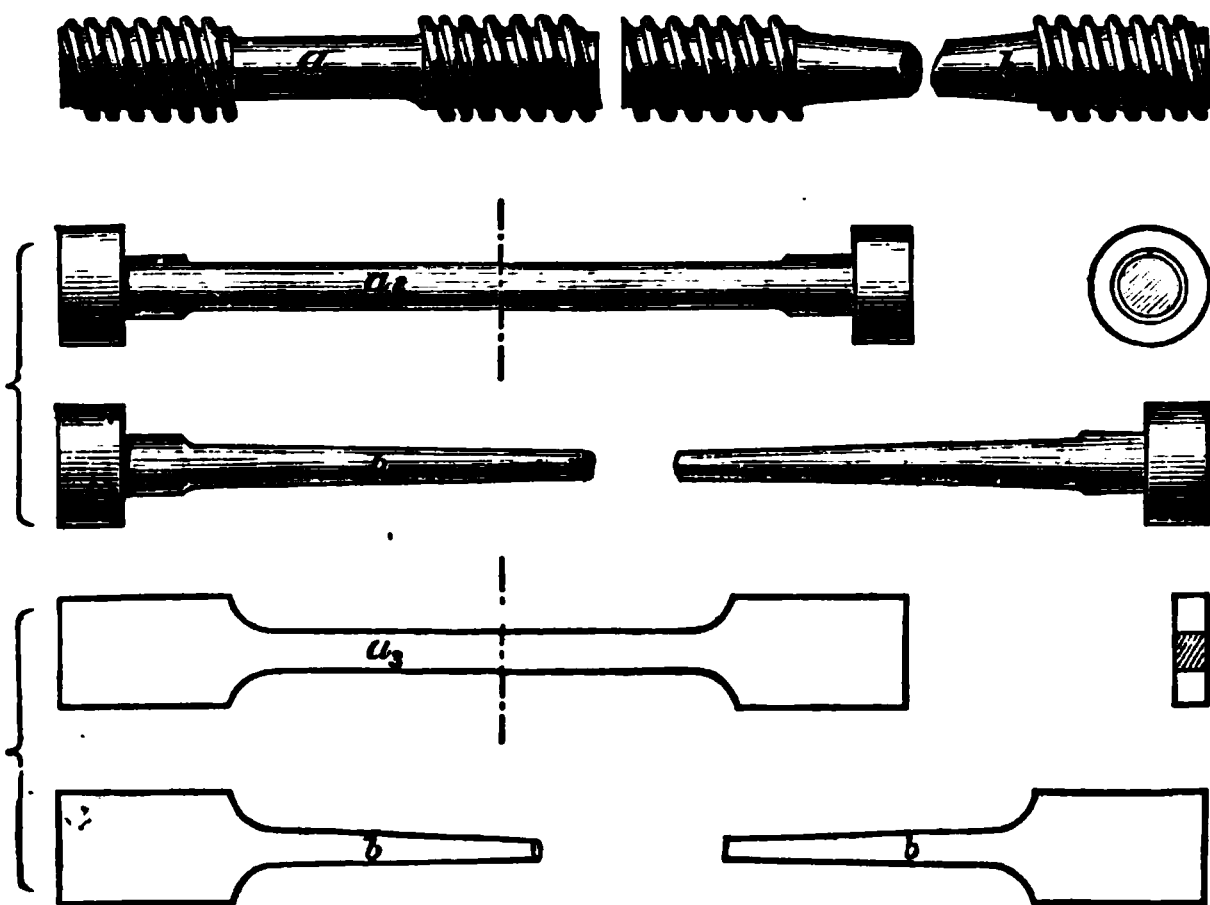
Forms of Test-pieces ; *a*, before fracture, and *b*, after fracture.
